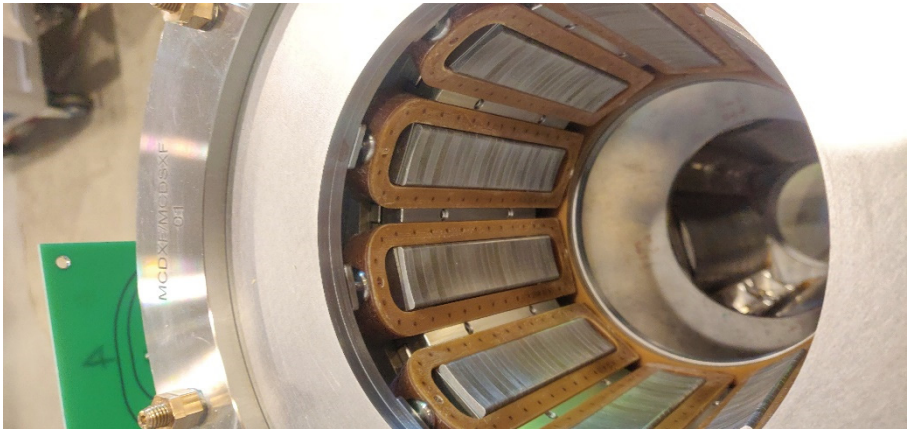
Inside view of a superferric dodecapole corrector under assembly at INFN-LASA-Milano. Well visible are the rectangular coils surrounding the flat iron poles.
